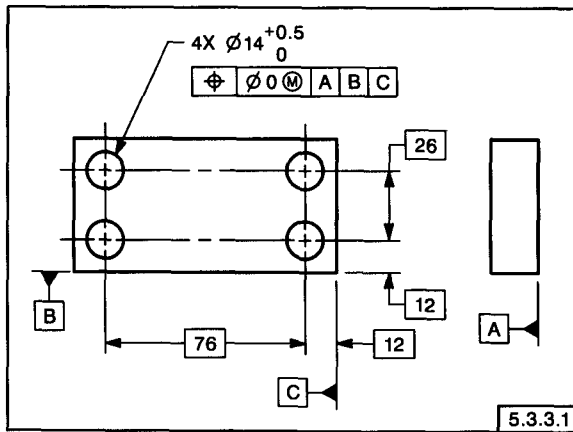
ZERO POSITIONAL TOLERANCING AT MMC
